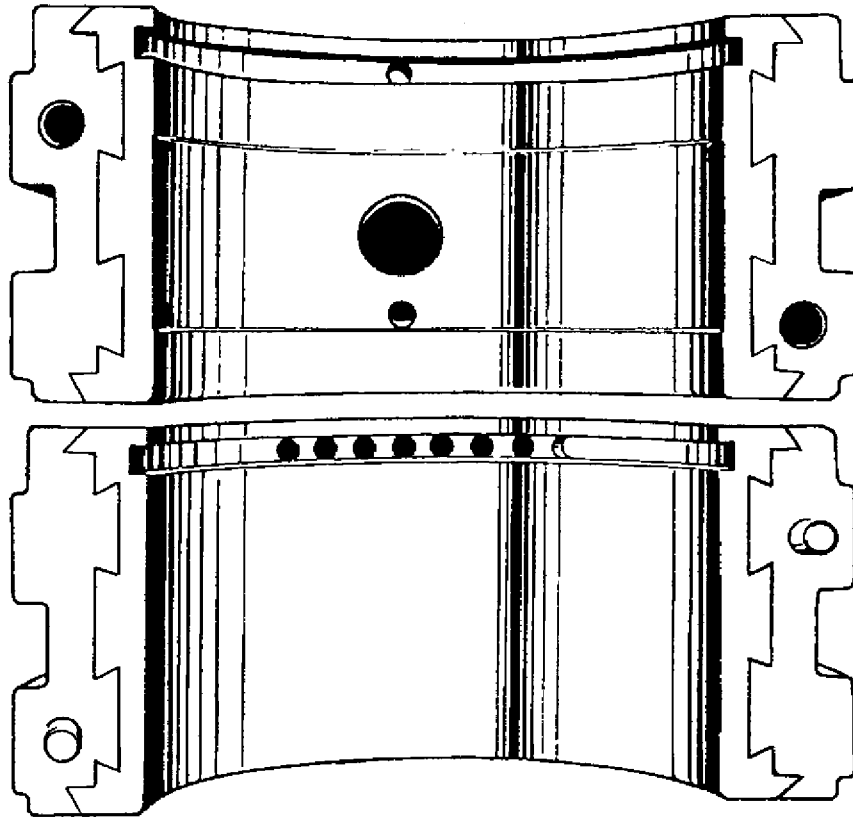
Cylindrically Seated Turbine Journal Bearing
